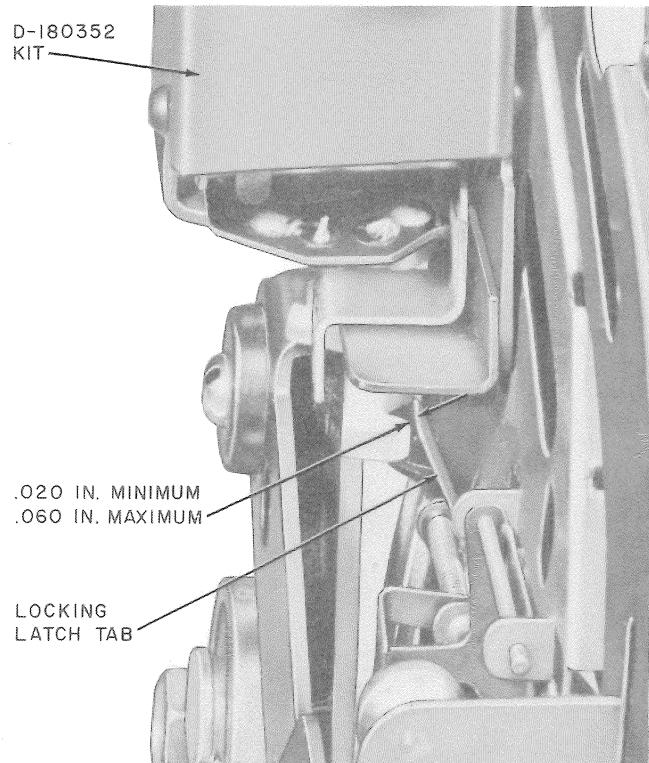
Clearance Between "D" Kit Lever and Locking Latch Tab
